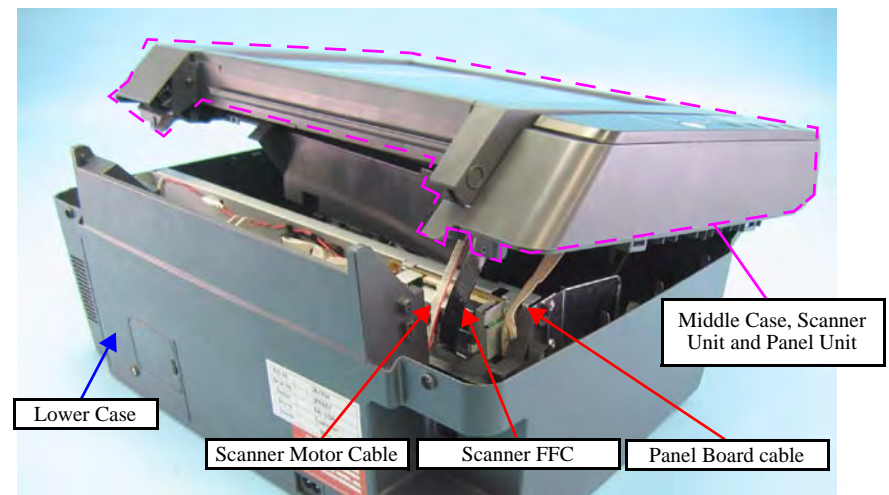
Removing Scanner Unit /Middle Case /Panel Unit (6)
